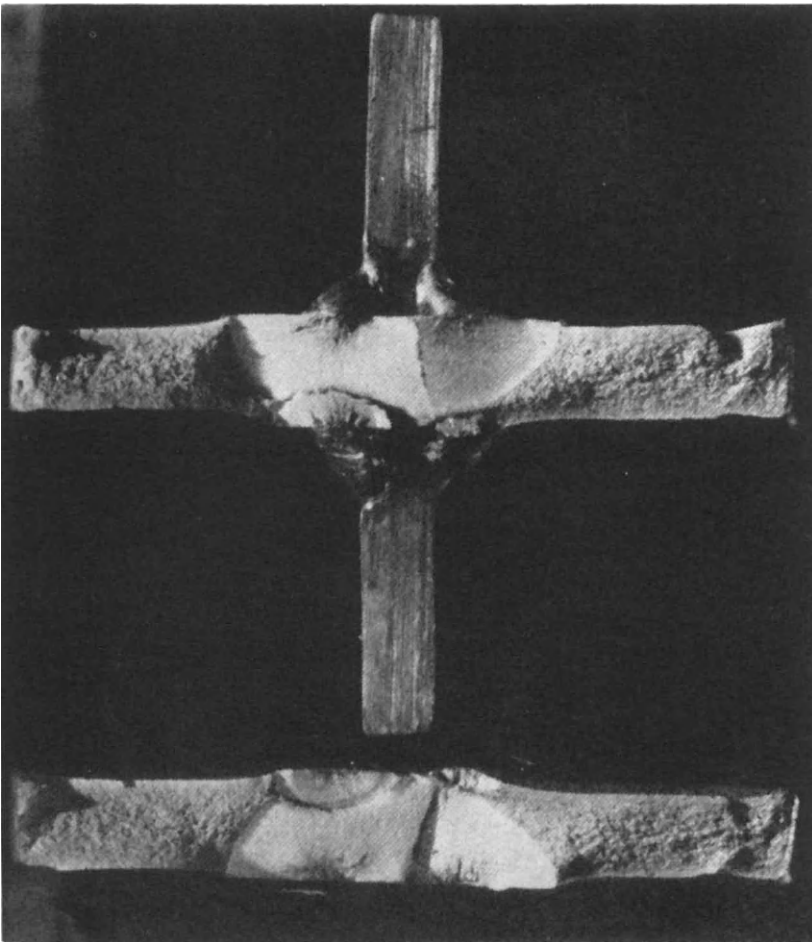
Fracture surface of a specimen in which fatigue cracking was followed by a ductile fracture.⁽¹¹⁰¹⁾
